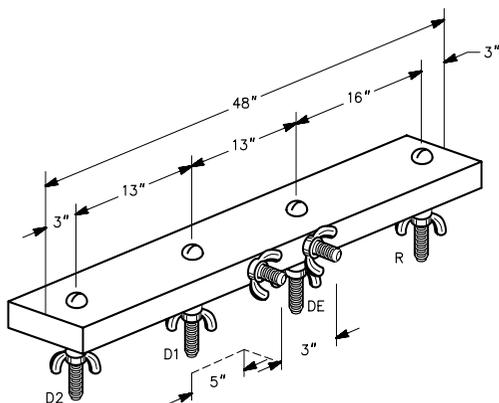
Detail of the boom showing hole center locations and boom-to-mast connection points.
